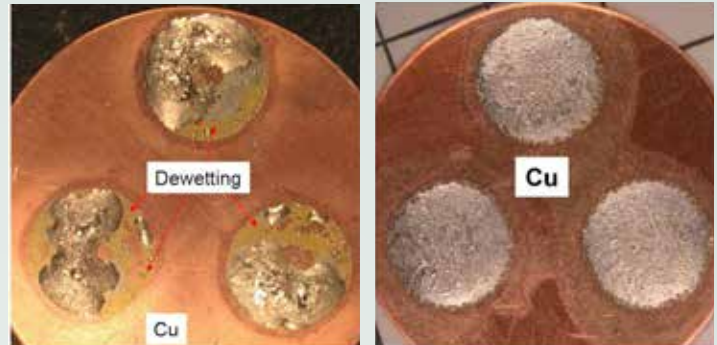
BiAg wetting on Cu Coupon. Figure 17b. BiAgX wetting on Cu Coupon.
